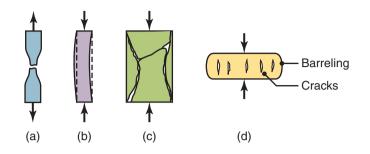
Schematic illustration of types of failures in materials: (a) necking and fracture of ductile materials; (b) buckling of ductile materials under a compressive load; (c) fracture of brittle materials in compression; (d) cracking on the barreled surface of ductile materials in compression.
